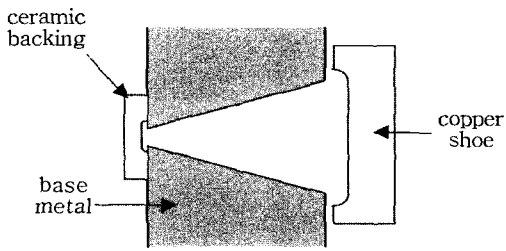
Preparation of welding groove, backing ceramic and water cooled copper shoe
